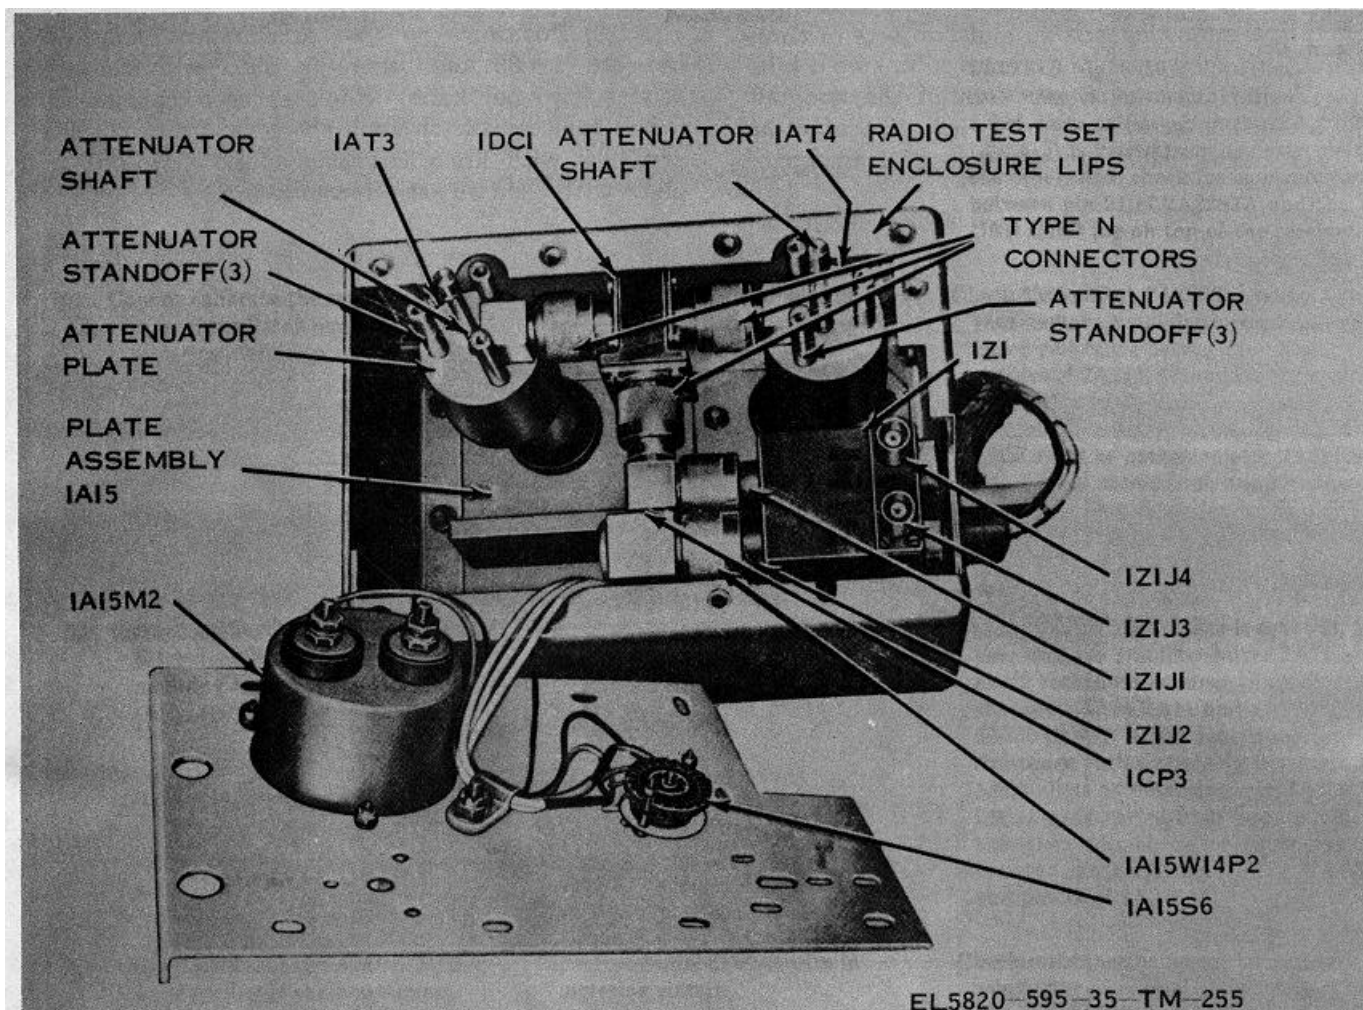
Transmitter radio test set, front view with meter panel removed, parts location.
